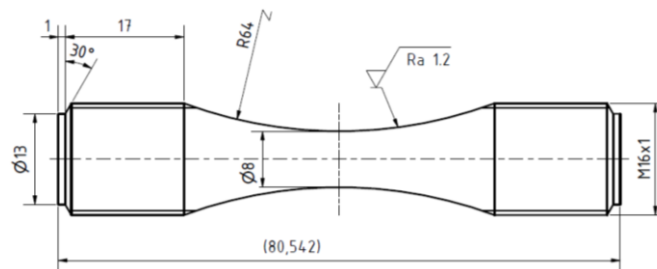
Geometry of fatigue specimens manufactured from 42CrMo4+QT steel, within the project [22; 23; 19].
